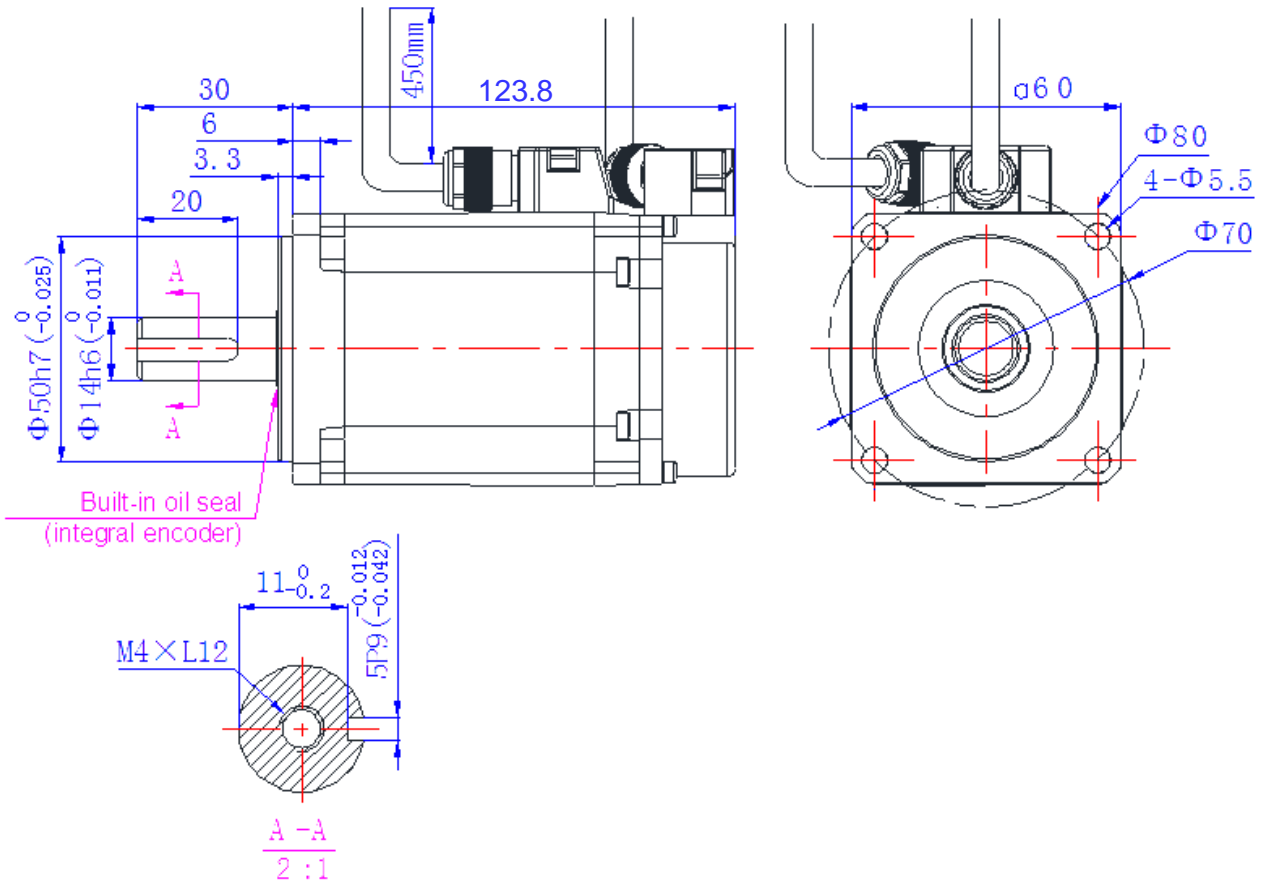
Outline dimensional drawing of ME060 series (without brake)
